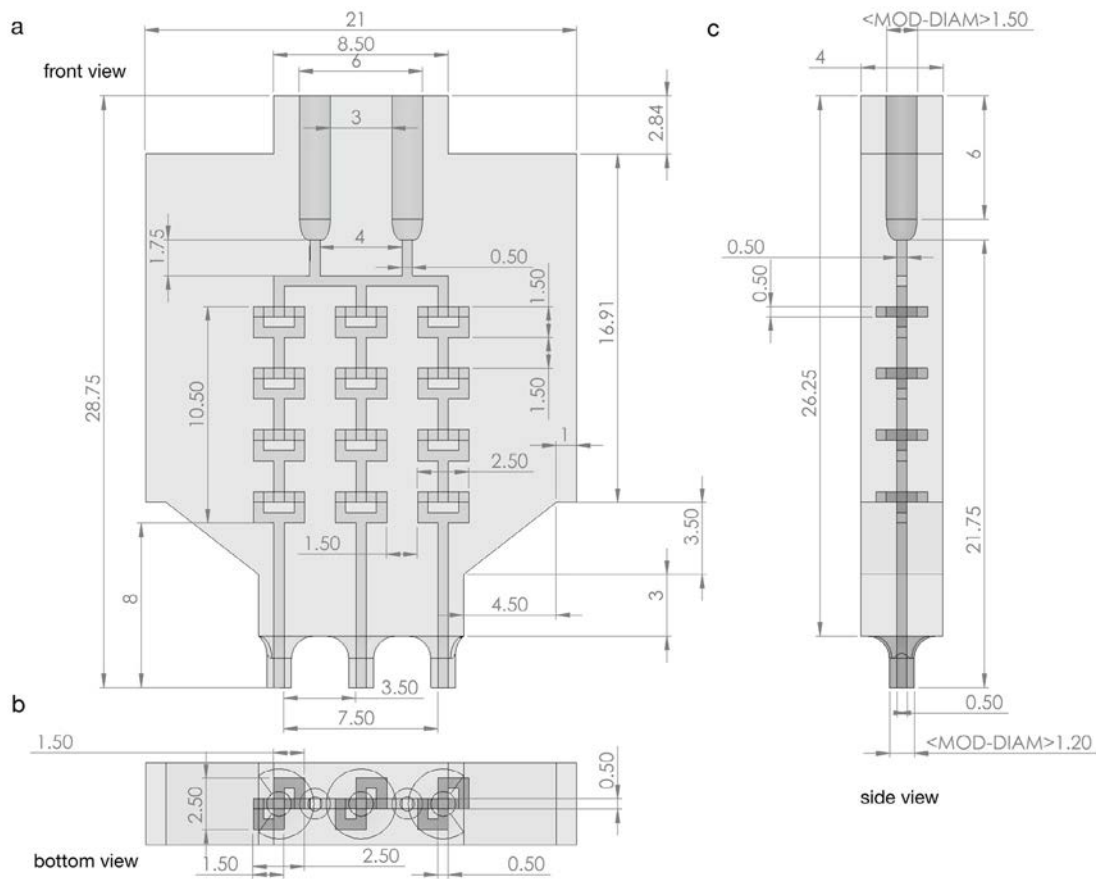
(a-c) Technical drawing of the microfluidic device showing the geometrical dimensions with respect to a) front view, b) bottom view and c) side view. All dimensions are in millimeter.
